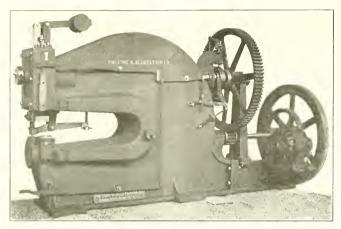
SINGLE FUNCHING AND SHEARING MACHINE.
